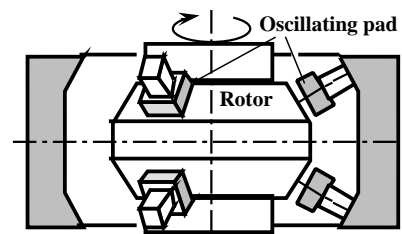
Arrangement diagram of rotor and six oscillating pads
